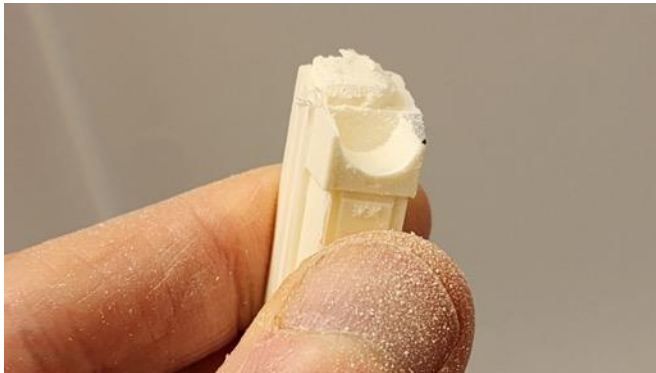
The ring sections were problematic due to poor casting. This excess resin needed to be carefully removed with a Dremel tool.
